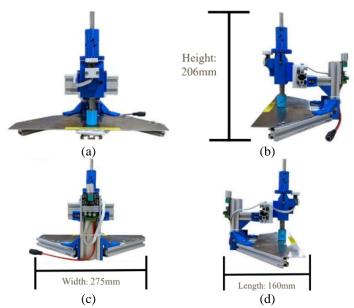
Assembled view of the machine: (a) front, (b) right, (c) back, and (d) left side.
